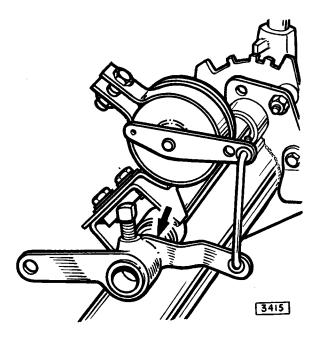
Aligning the flat on the control rod with the setscrew in the transmission control bracket.
